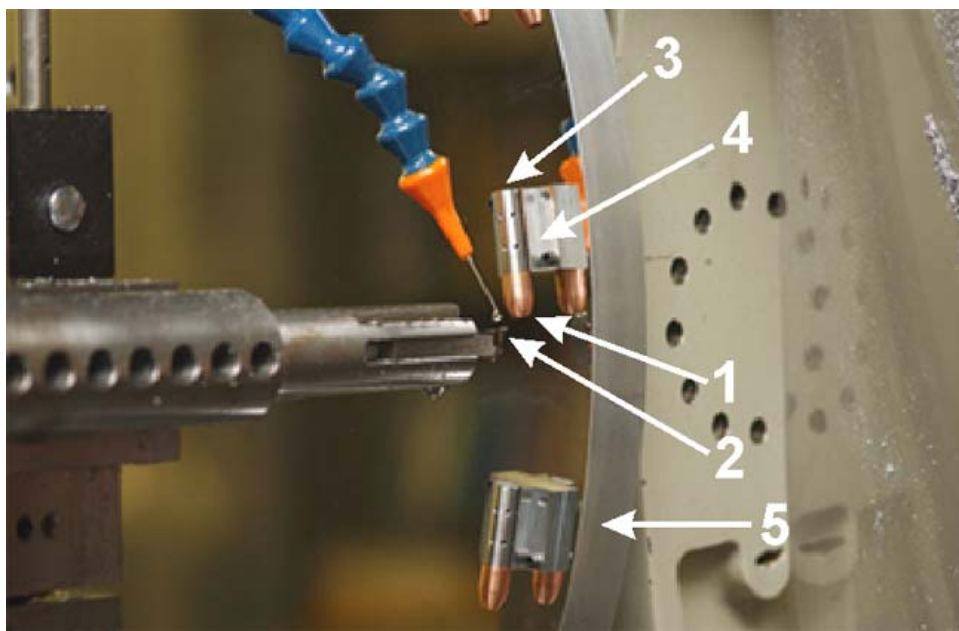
Manufacturing setup for NIST RM 8240 standard bullets: One (1) of 20 standard bullets cut by a diamond tool (2). Each bullet was fastened to a cylinder (3), which was mounted on a “V” block (4) set on an aluminum wheel (5). 20 bullets were manufactured at the same time.
